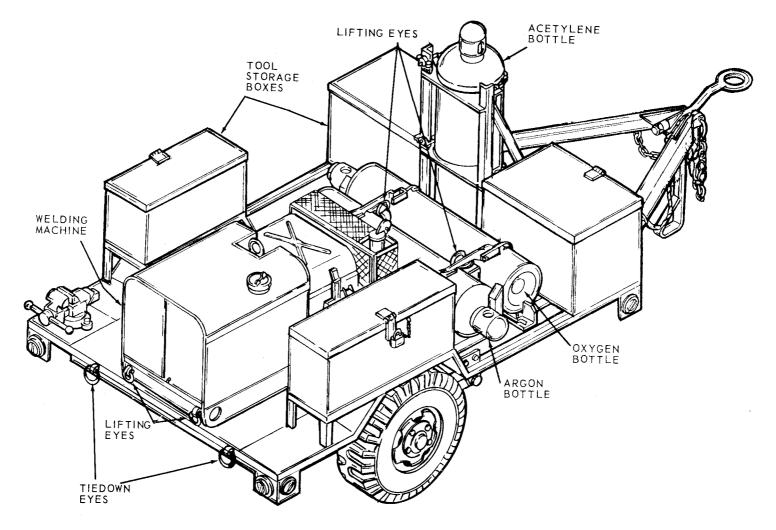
Welding shop, trailer mounted, left front.
